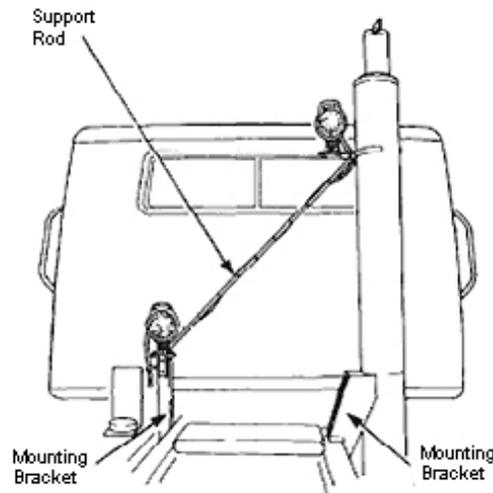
Mounting Bracket and Support Rod - Exhaust Vertical Section
